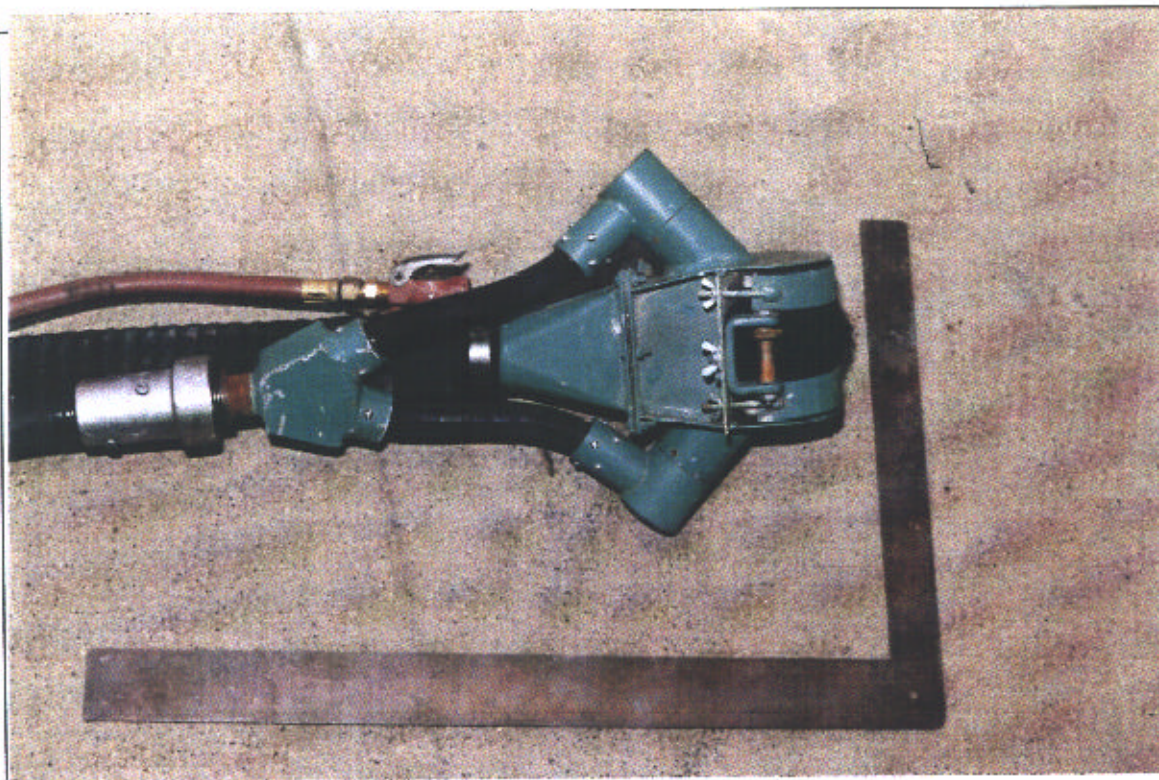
Newer style three-edge head, showing hose arrangement and control valve.
